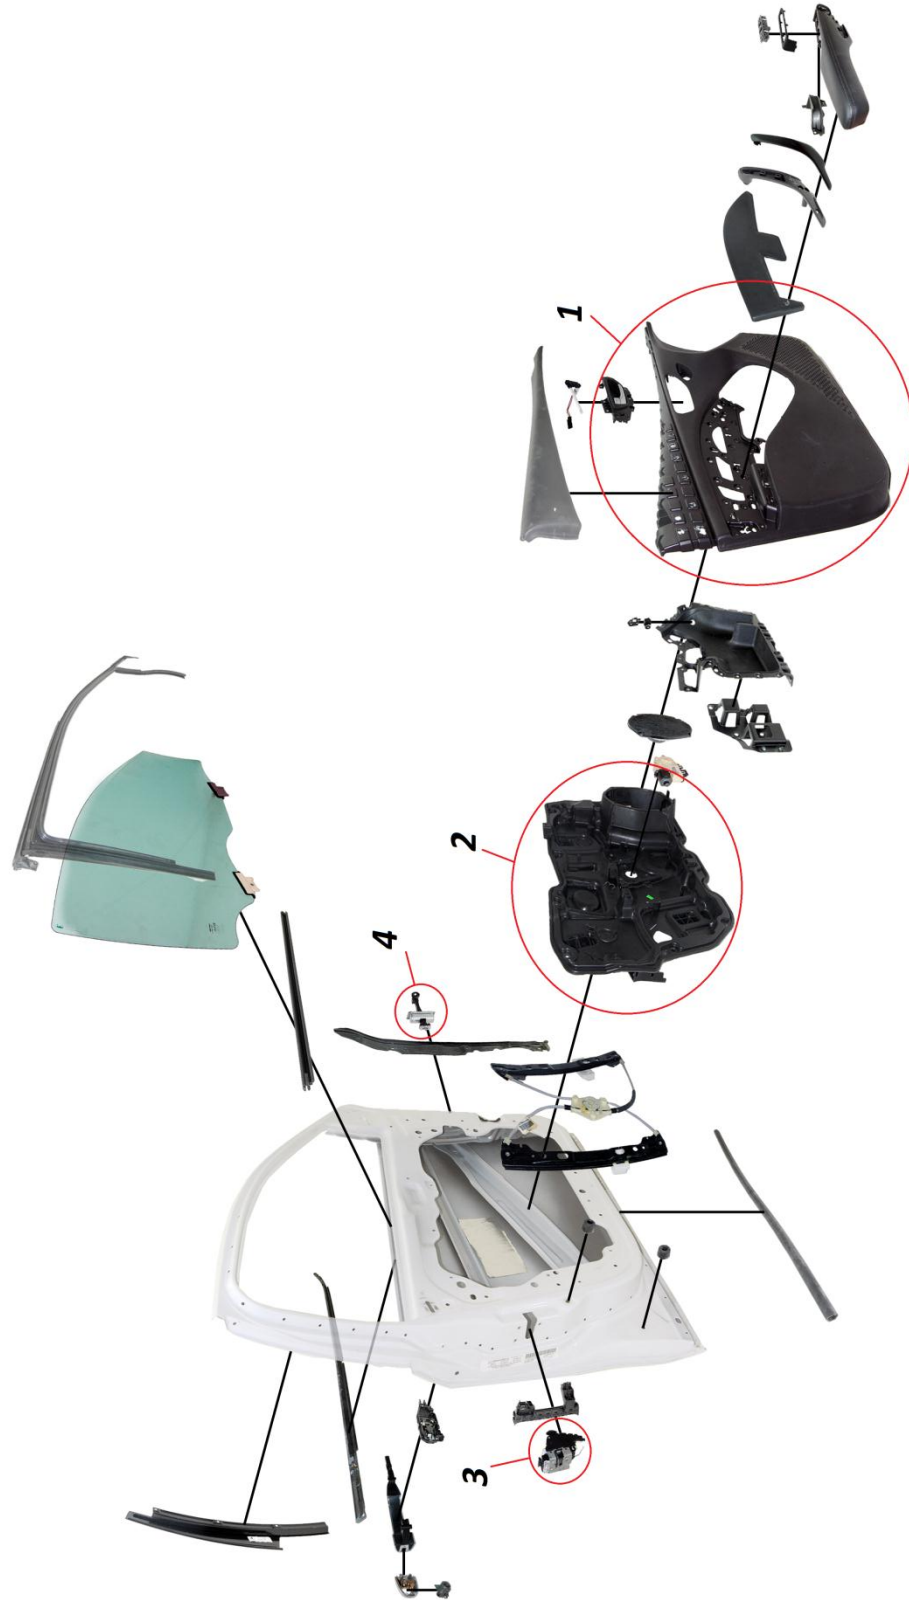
Exploded view of a front left door [1]. Specifically numbered from 1 to 4 are the following components: 1) Door trim panel, 2) Door module, 3) Door latching mechanism, 4) Door check system.
